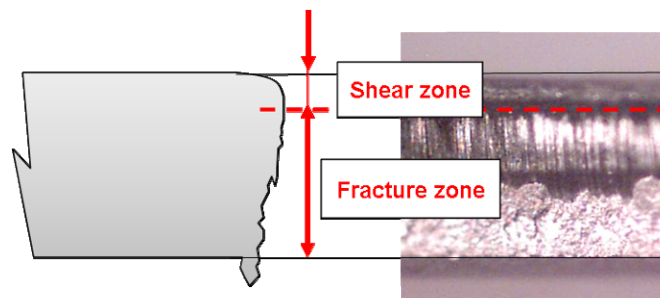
fractured surface: shear zone and fracture zone distinction.
